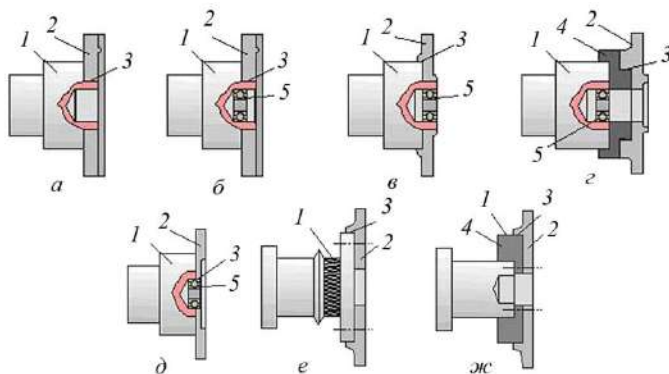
Designs of crankshaft rear flanges and methods of centering the flywheel: *and*– in the center of the belt (for automatic transmissions)
